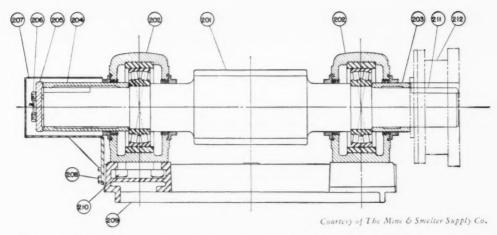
Roller bearing pinion shaft assembly for a Marcy Mill showing method of sealing for oil retention, and housing arrangement for controlled level for the flood oiling system.
